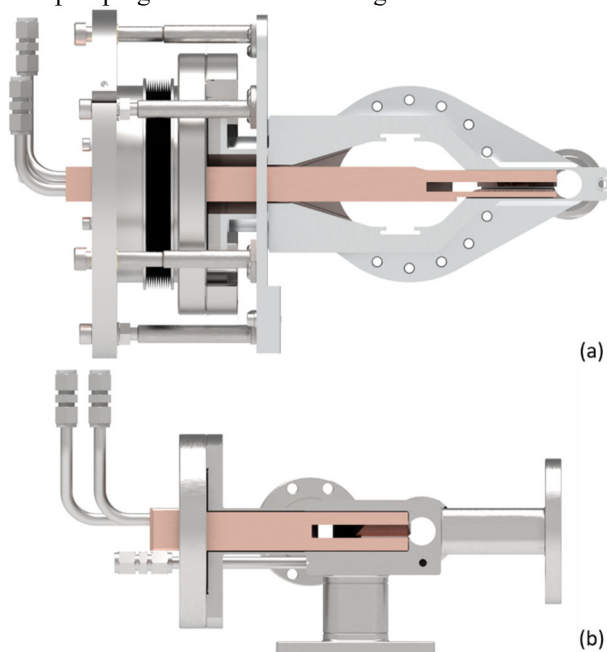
Cross-sectional view of (a) B:CA1 mounted to the B:M2 L-bend vacuum chamber and (b) A:CA1 mounted to the A:VC6 stainless steel vacuum cross.
